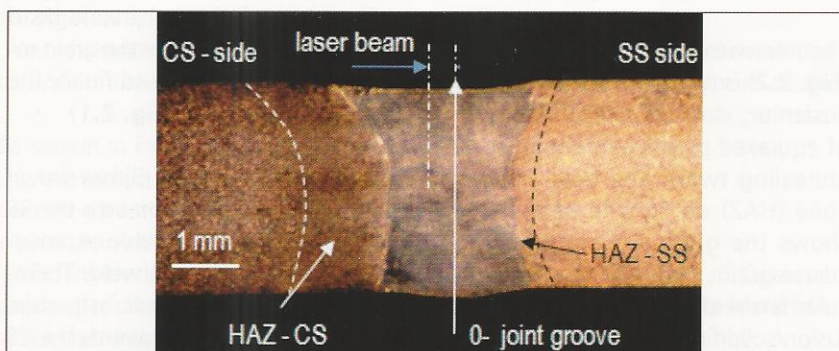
Macrostructure of a dissimilar laser welded joint and the laser beam position with respect to the joint groove.
